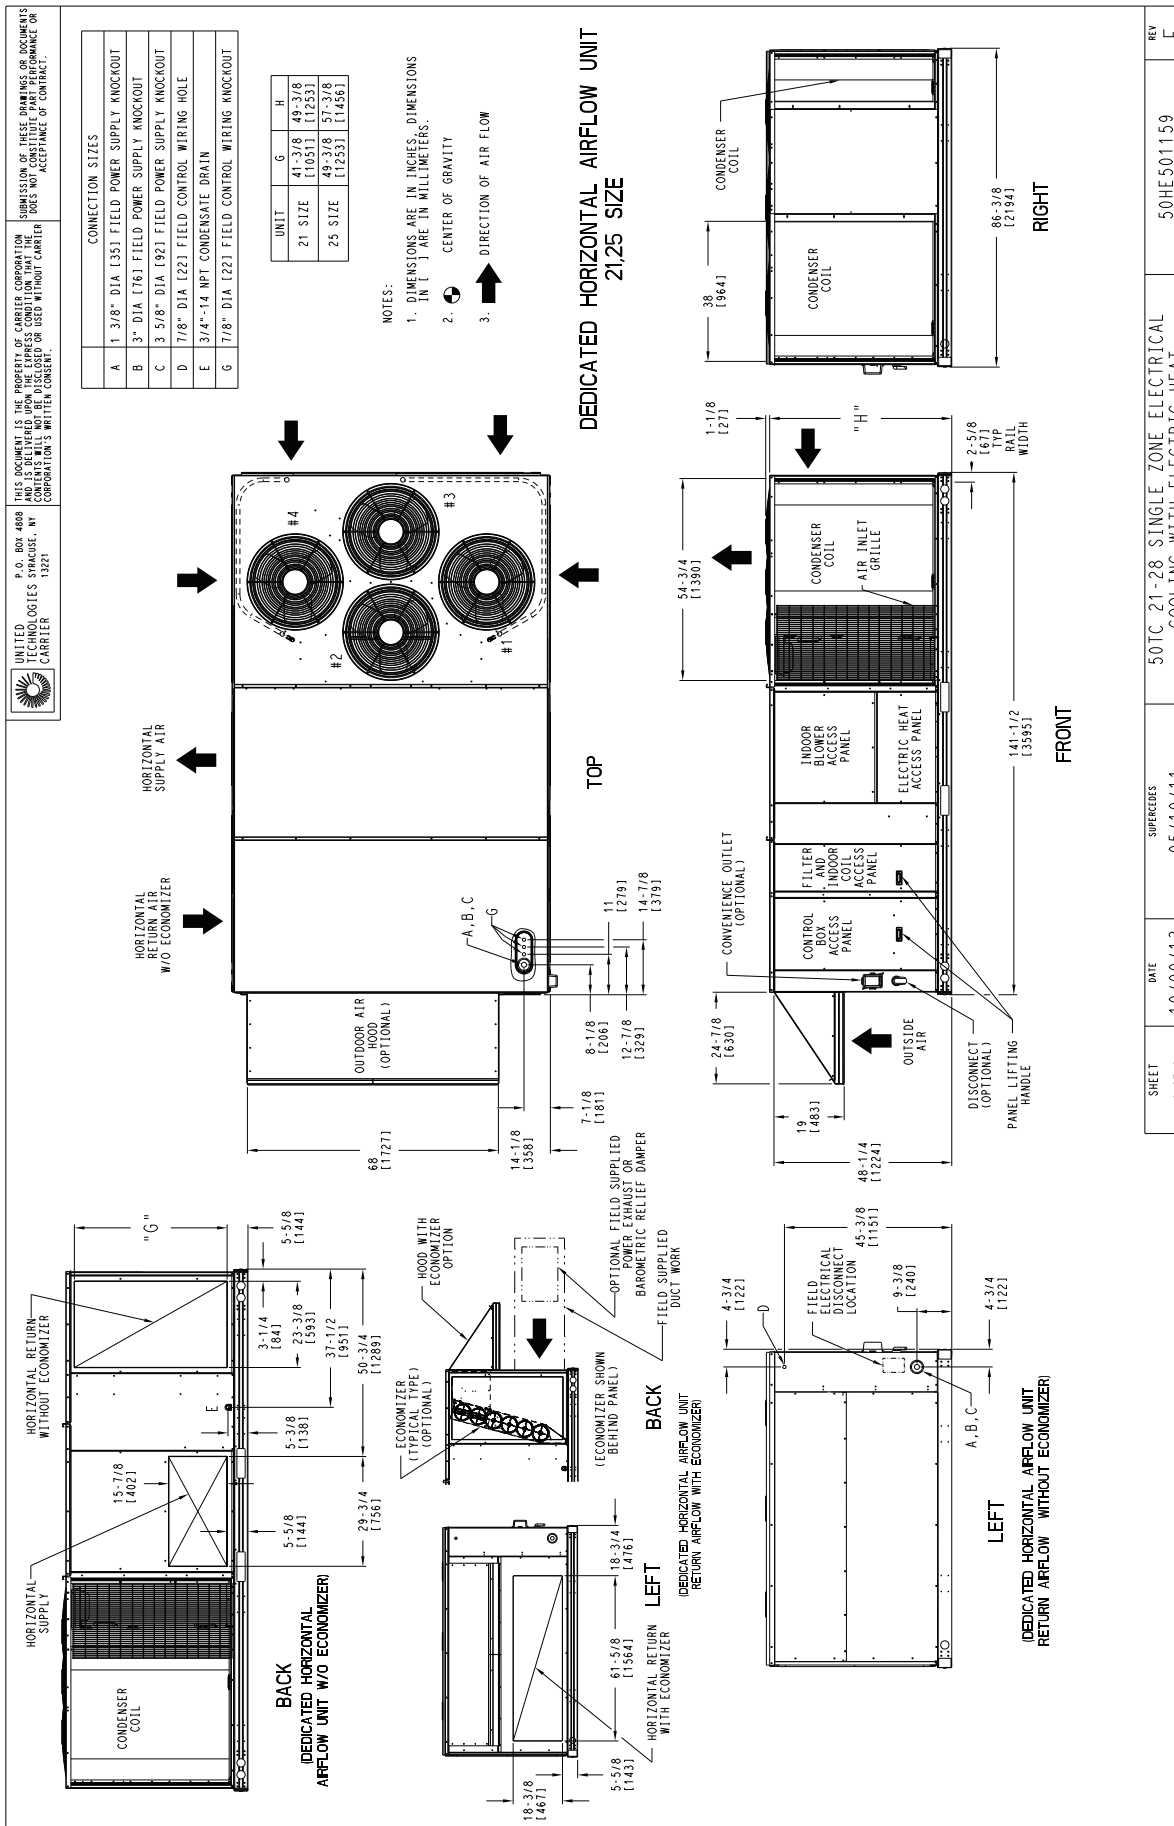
Unit Dimensional Drawing – 21 and 25 Size Units
